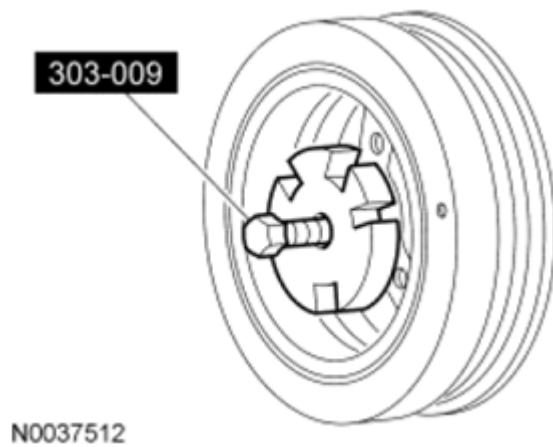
Removing Crankshaft Pulley Using Crankshaft Vibration Damper Remover
